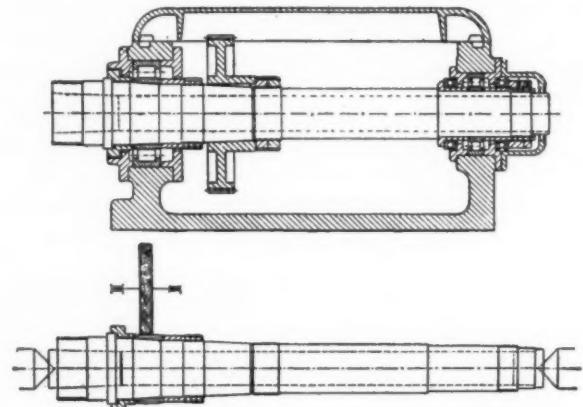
SPINDLE AND BEARINGS OF HIGH-DUTY LATHE BUILT BY GEBR. BEOHRINGER, GOPPINGEN
